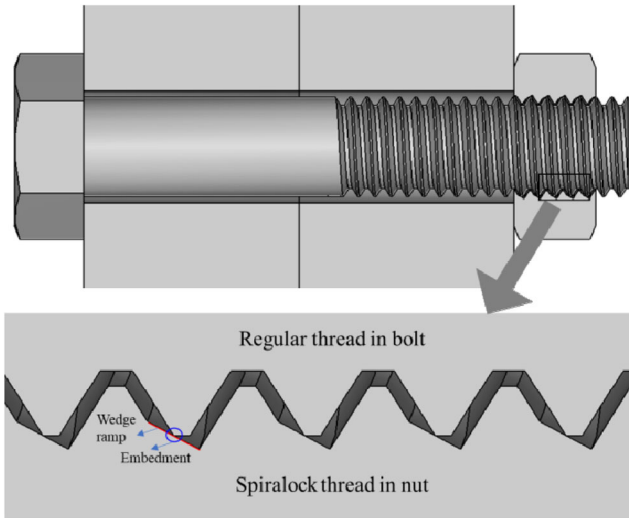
Schematic of engagement between regular thread in bolt and Spirallock thread in nut.
